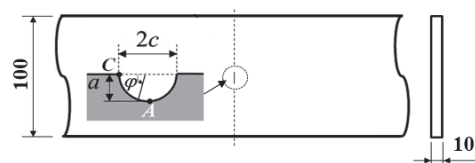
Schematic diagram of a finite plate with electric discharge machining crack
